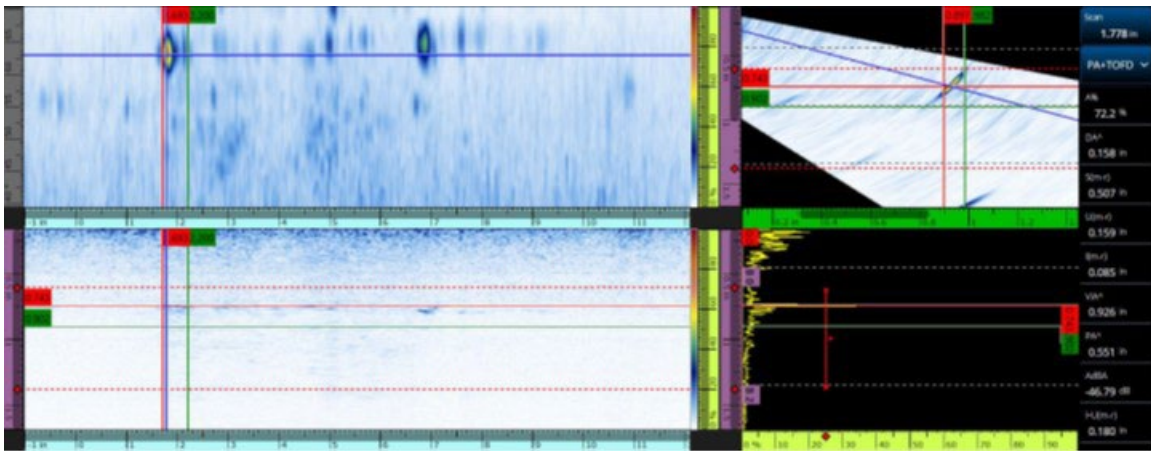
PAUT indication of defect at Location C in filler weld test panel MGL-10 from OD-raster scan
